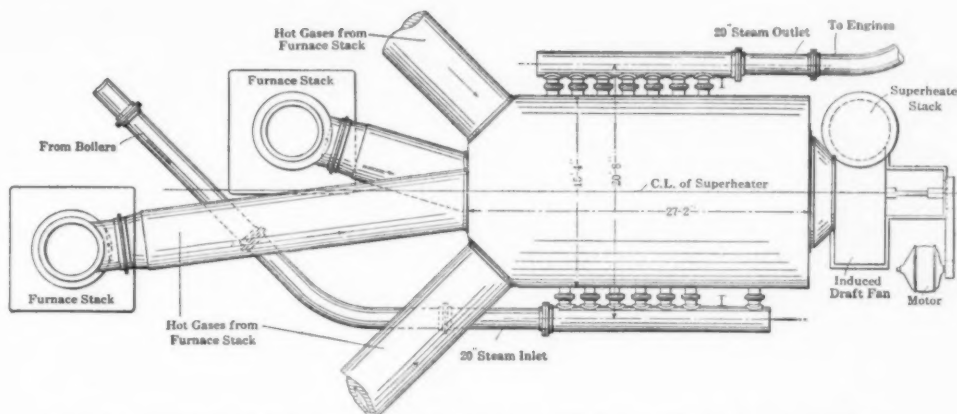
General View of the Plant Which Superheats the Steam from Boilers Aggregating to 8,000 Horse-power.
